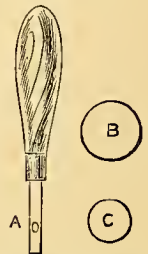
HOLE-PIERCING TOOLS OR PUNCHES.
